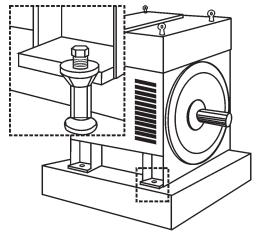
Motor mounted on a concrete base with foundation studs
